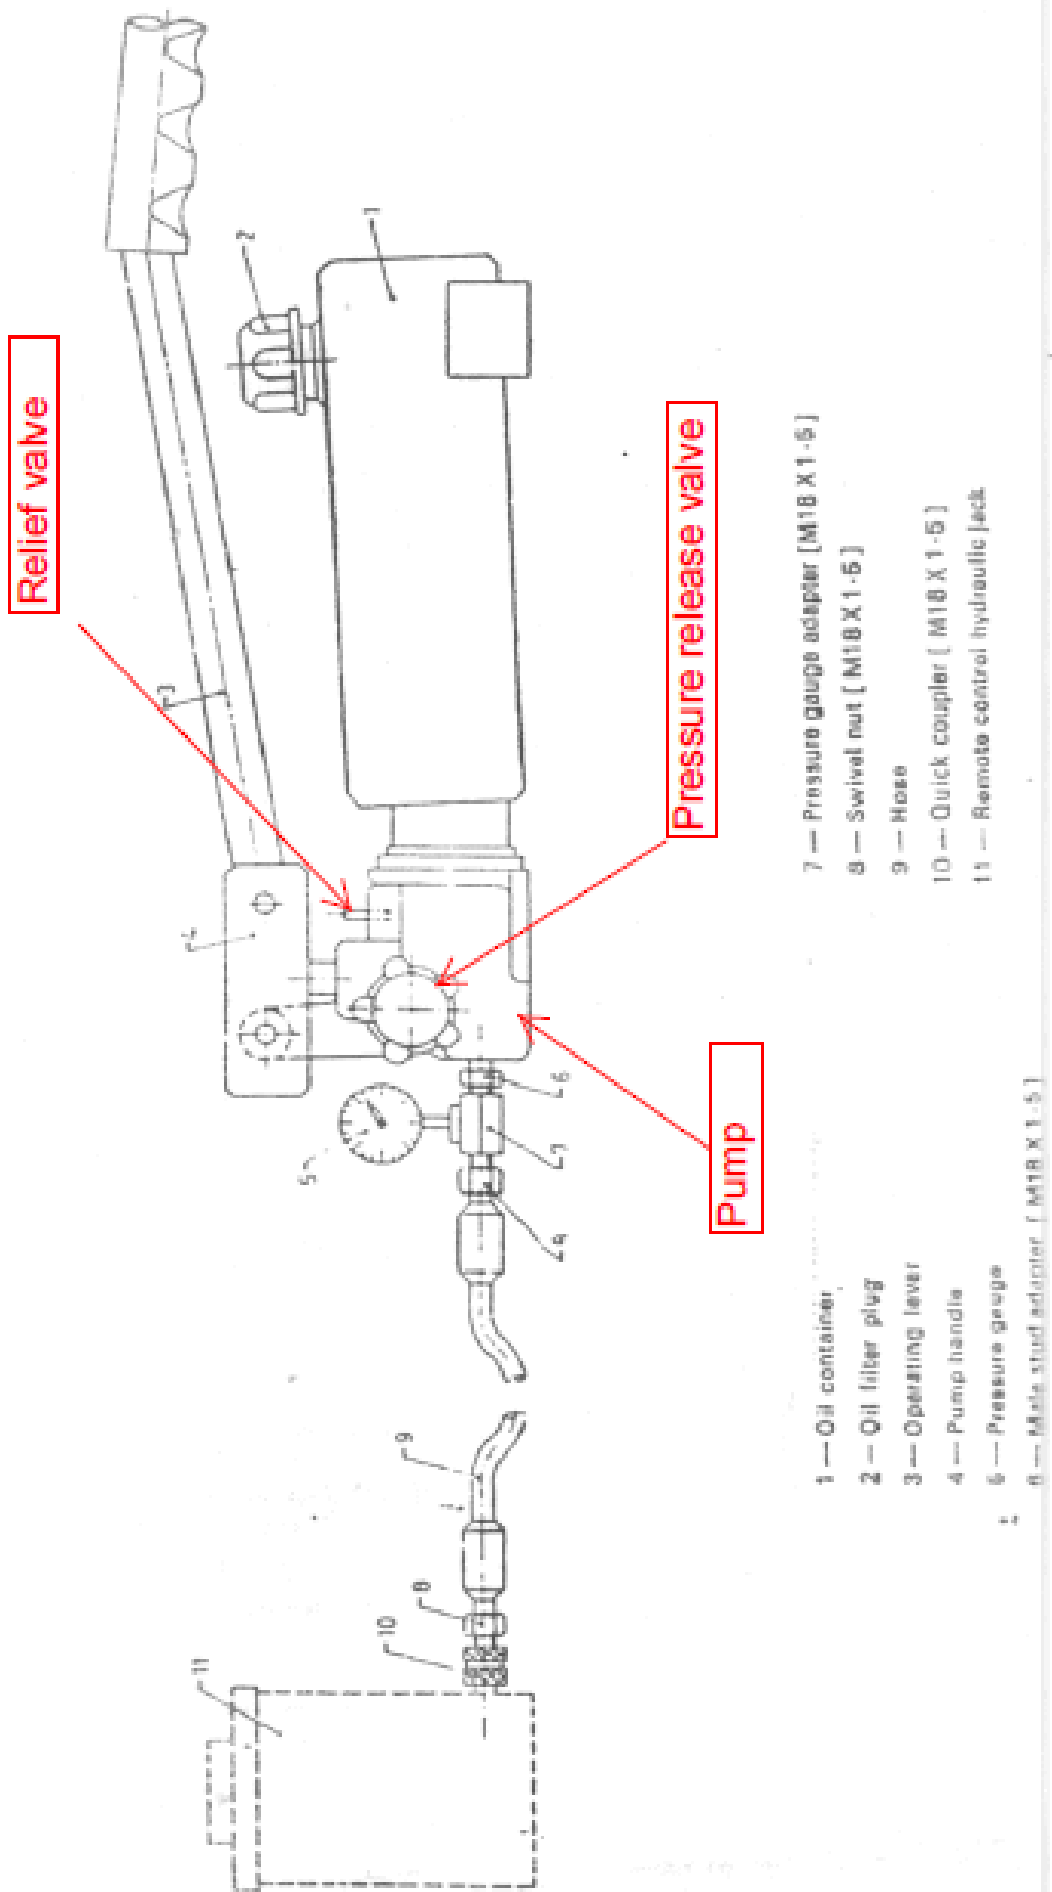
SCHEMATIC DIAGRAM OF TWO-STAGE HYDRAULIC HAND PUMP AND ITS CONNECTION TO THE REMOTE CONTROL HYDRAULIC JACK
